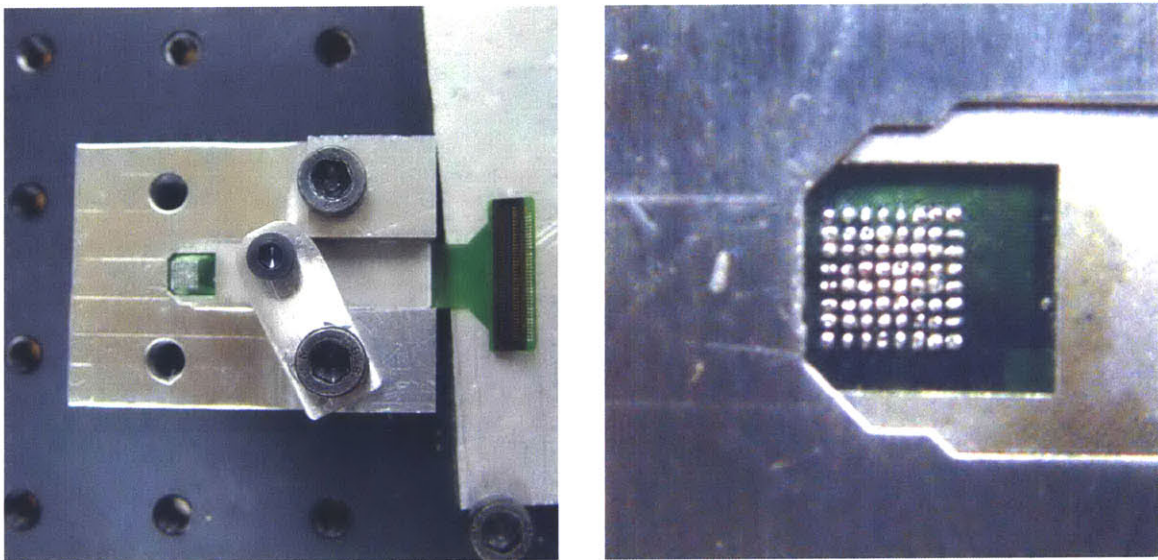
shows a magnified view of the electrode supports holding the substrate at the desired elevation. After the substrate is secured, the assembly would be removed by EDM as in the TEAS case. The shorter supports would also be cut, but would simply fall clear as they would not be epoxied to the substrate.
